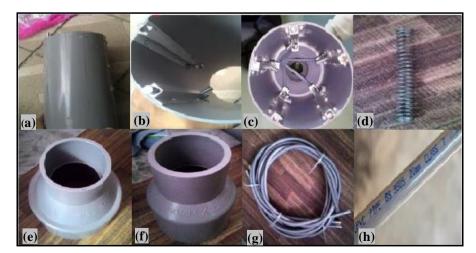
Components and Fabrication steps. (a) PVC pipe cutting for casing; (b) door latch installation as jaws; (c) complete latch installation; (d) compression spring installation; (e) reducer installation; (f) pipe PVC connector; (h) connecting jaws and pedal using cable; (g) Installation of pole
